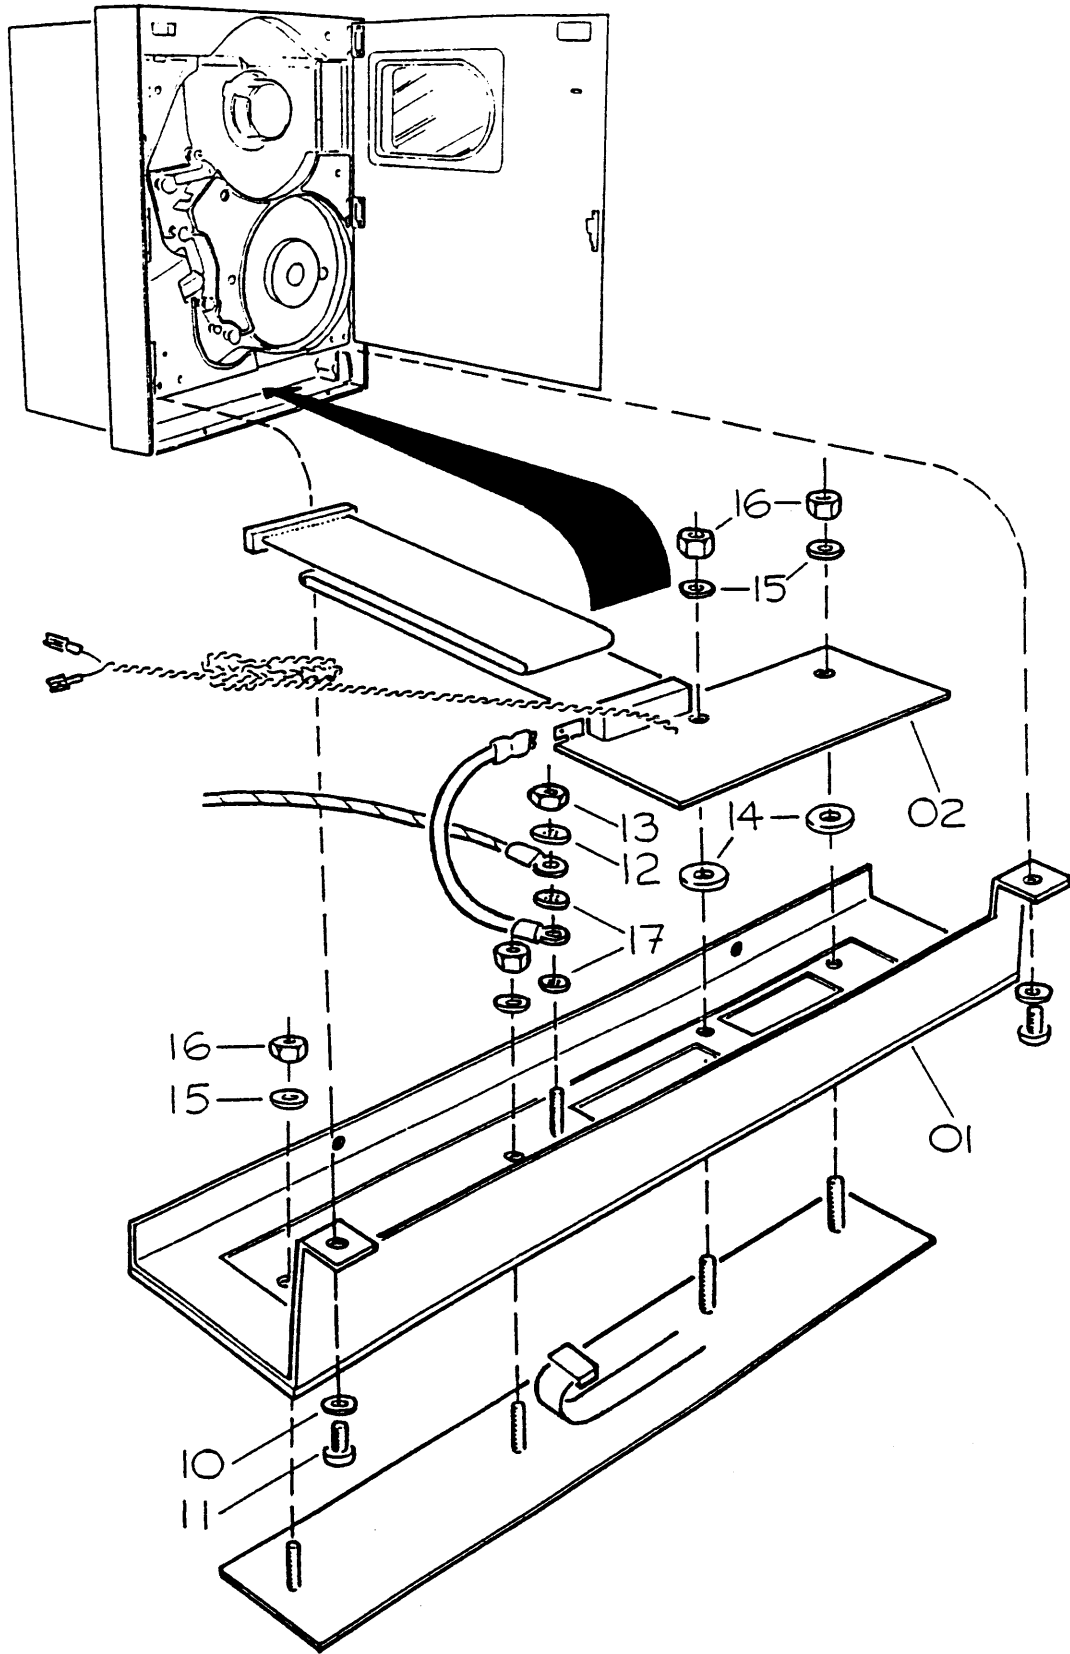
OPERATOR PANEL AND SWITCH FASCIA PCB
